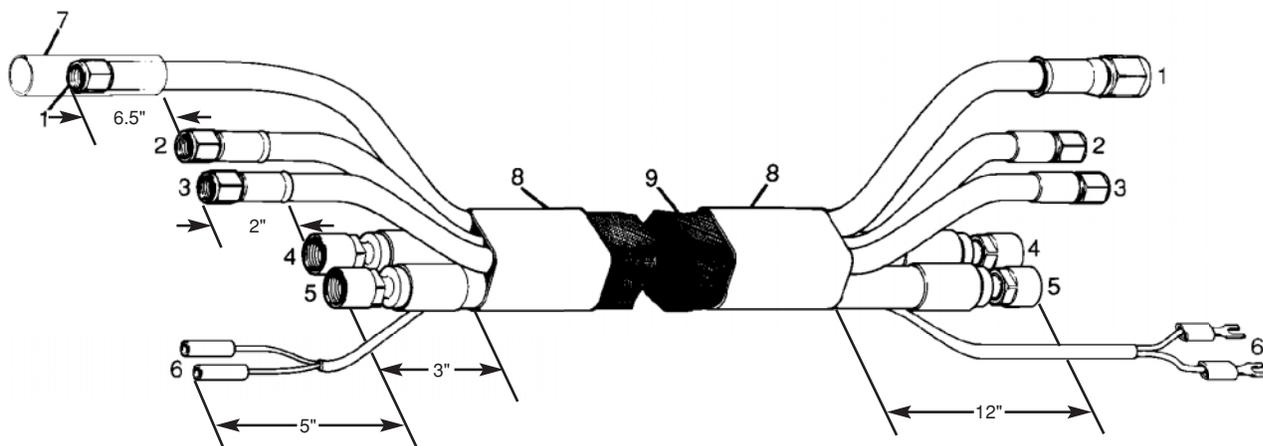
MAX200 Rev 1 90° Hand Torch Lead Set Assembly
